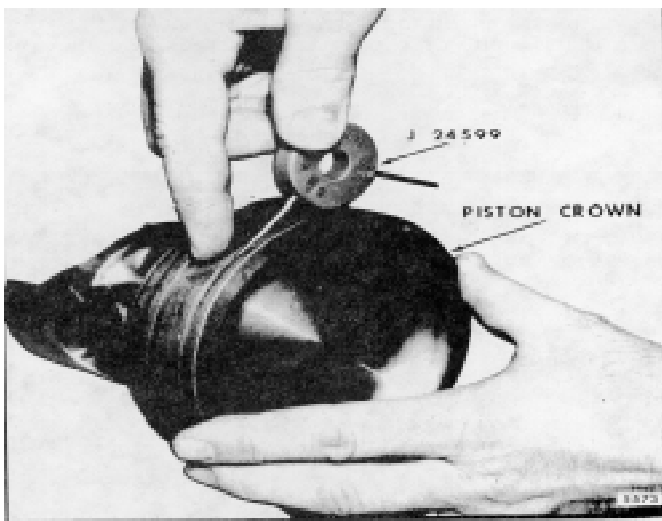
Checking Fire Ring Groove in Piston Crown
